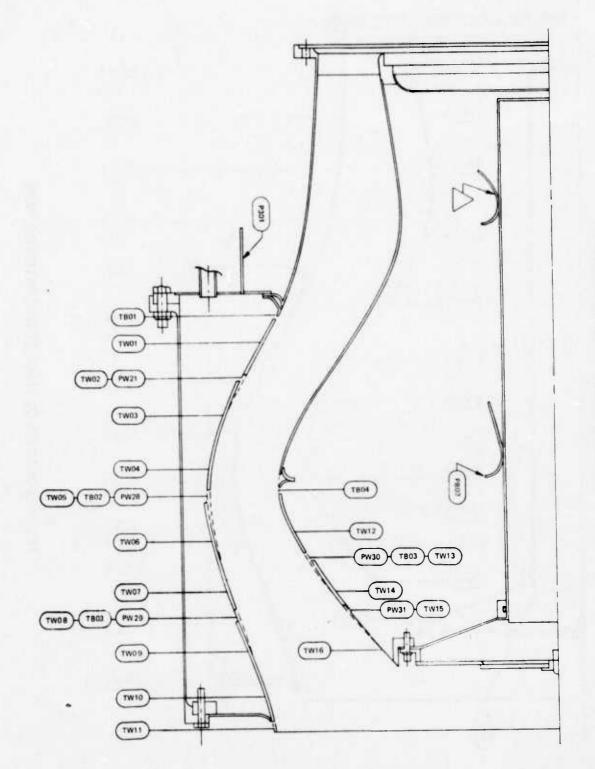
LOCATION OF WALL THERMOCOUPLES.
